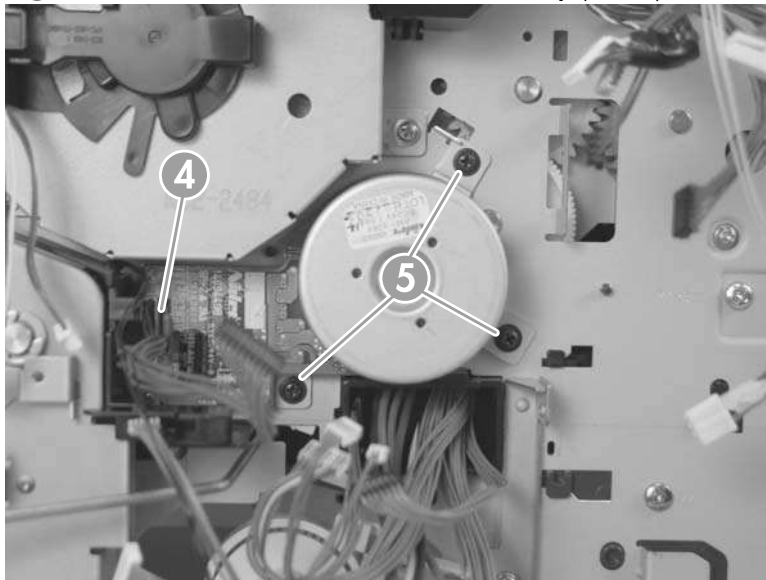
Remove the fuser-motor assembly (2 of 3)
